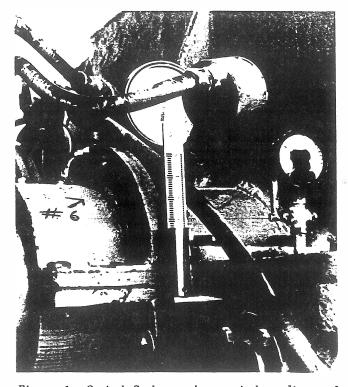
Optical Scale set for vertical reading and showing difficulty of getting a point on a bearing housing of a gear case.
